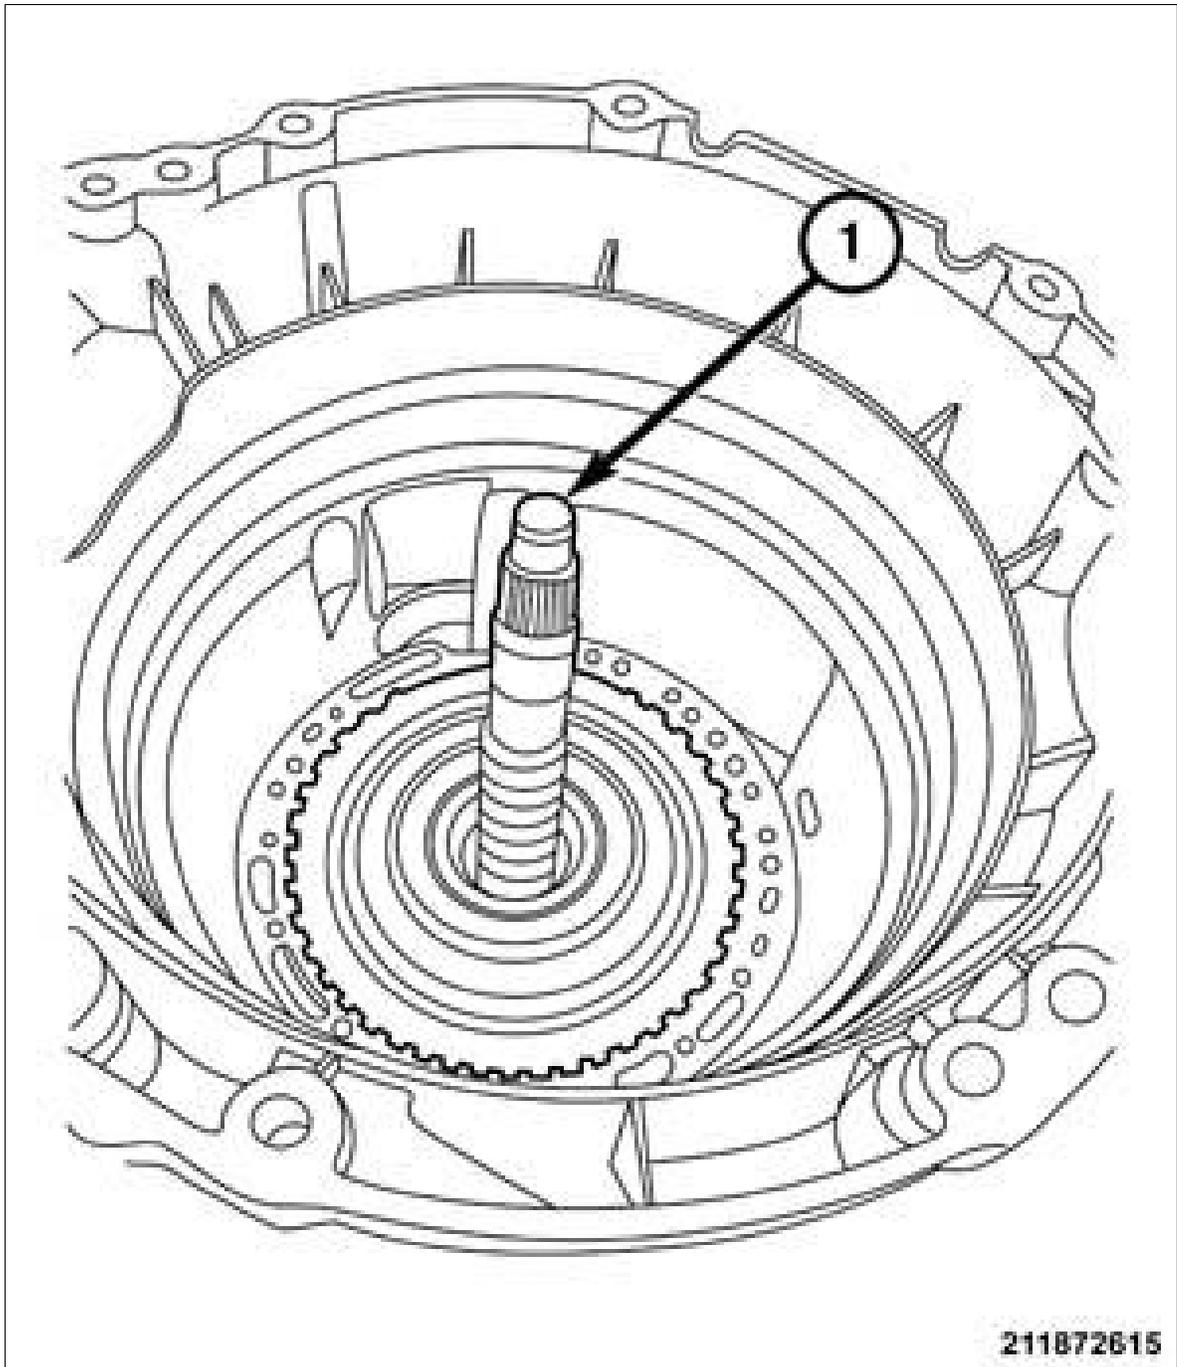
Outer Bearing Snap Ring & Outer Needle Bearing
